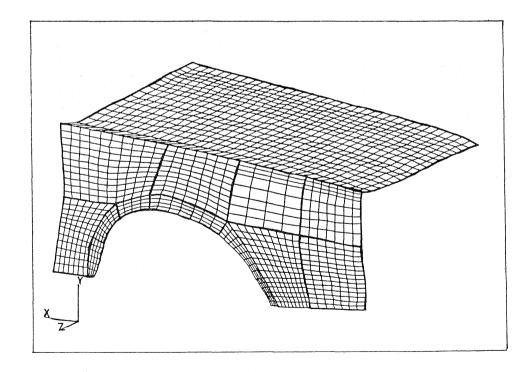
Patch division and patch networks of car hood part and wheel housing.
